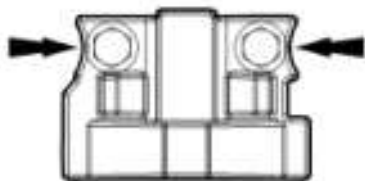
Identifying Valve Spring Compressor (303-1039)
